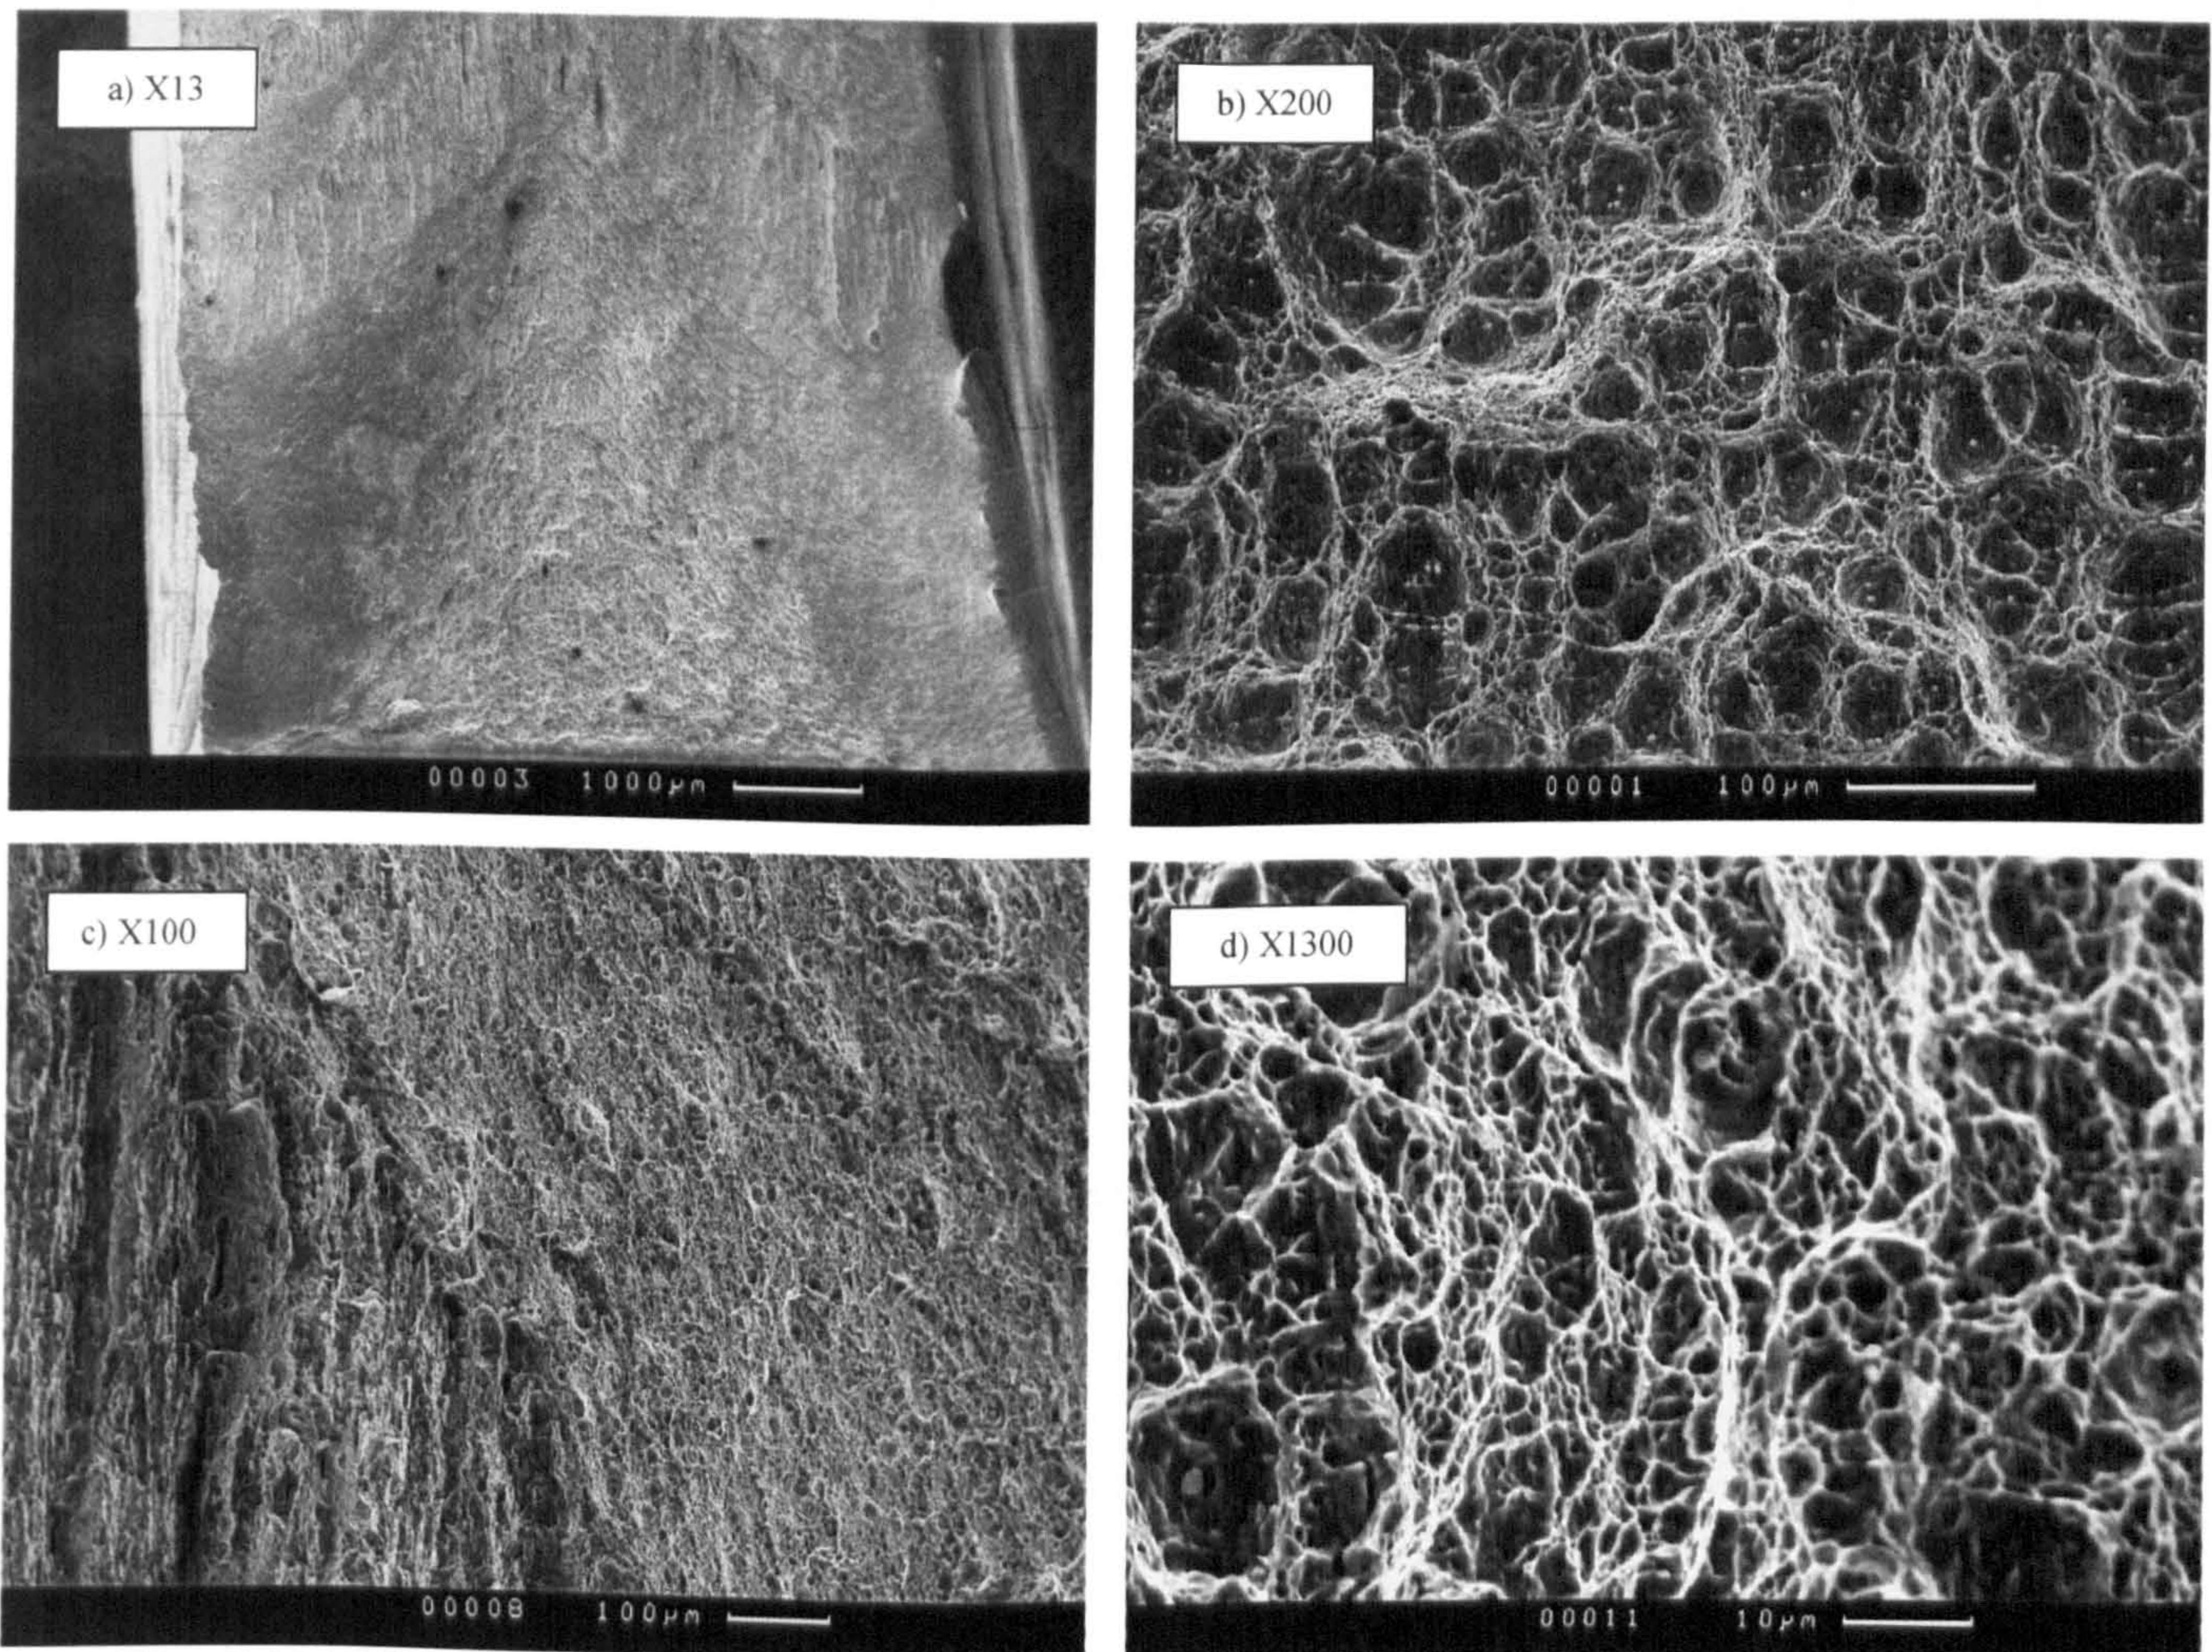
SEM fractography of tear specimen: a) fracture area showing the triangular flat fracture area. The successive beach marks of quasi-cleavage fracture and slanted plane regions b) close up of the large dimples in the flat fracture zone, c) close up of the quasi-cleavage and shear fracture areas d) close up of dimples in the slanted zone of the sample.
